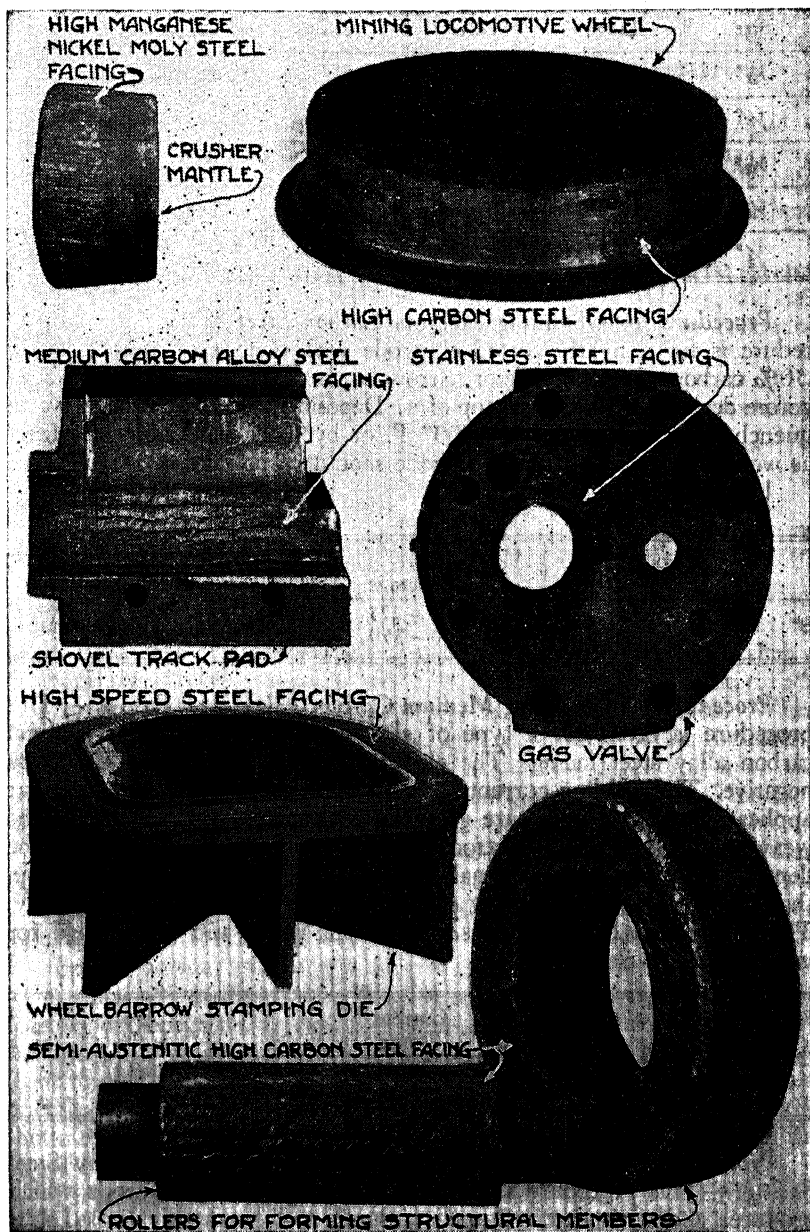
Group of parts hard-faced by arc welding.
